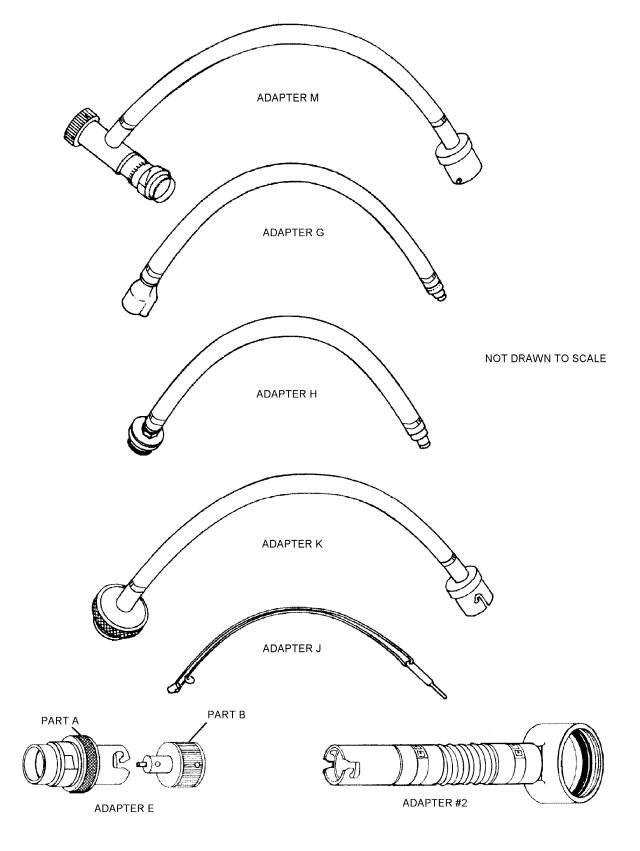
Respirator Assembly Test Set Components - A/E47T-28 (Sheet 3 of 3)
